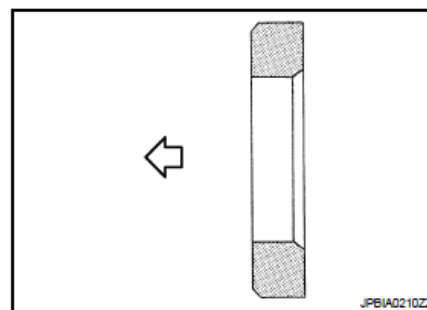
[Identifying Pilot Converter With Chamfer Facing Crankshaft]
